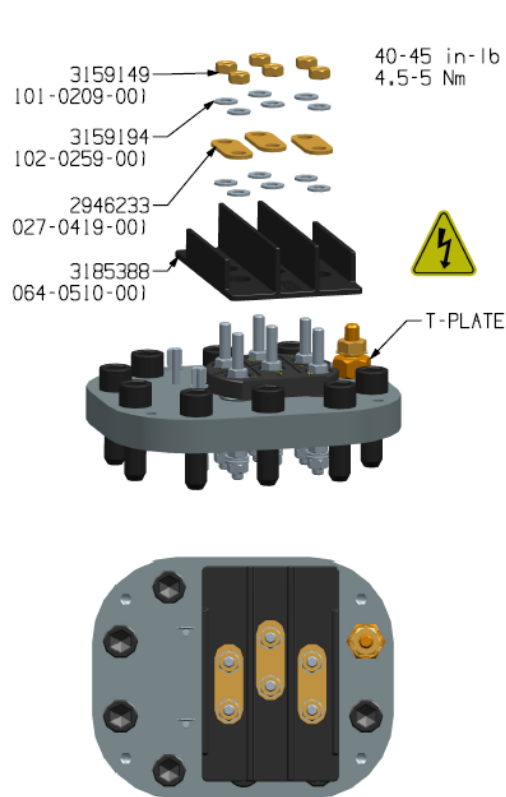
Hexagon socket screws (Allen / Inbus) & hexagon heads (Wrench)
